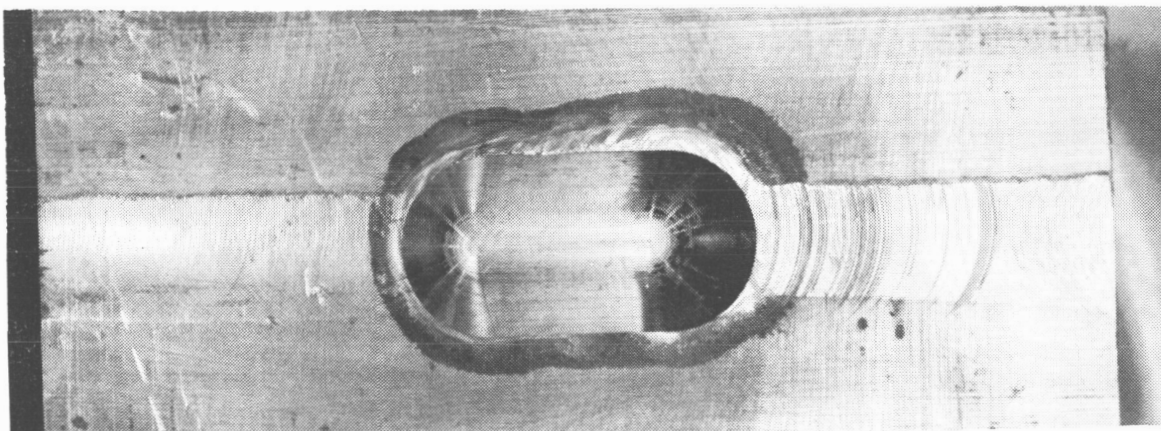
One-Inch Plate Weldment Showing Milled-Out Section Prior to Repair Welding
